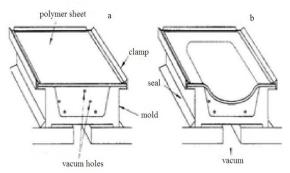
Vacuum forming: (a) preheated clamped sheet over female mold prior to forming; (b) vacuum applied [9].
